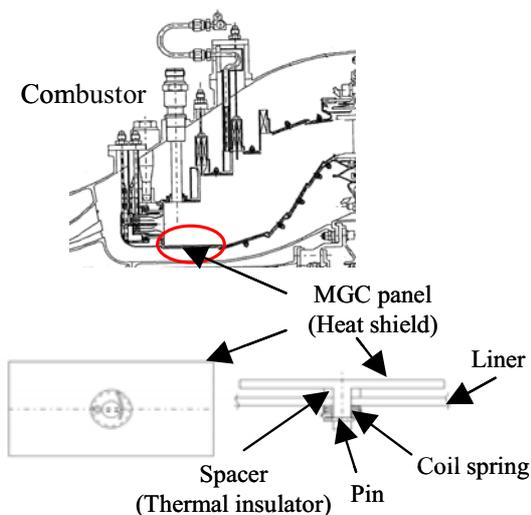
Structural design of MGC heat shield panel for combustor liner
